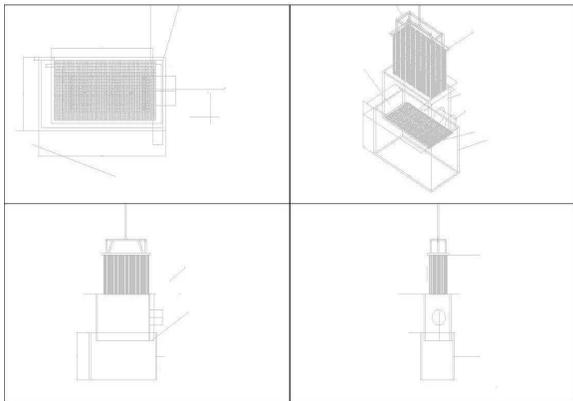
Sketch of the Rubbish Pickling Machine (in Three Views and Isometric)
